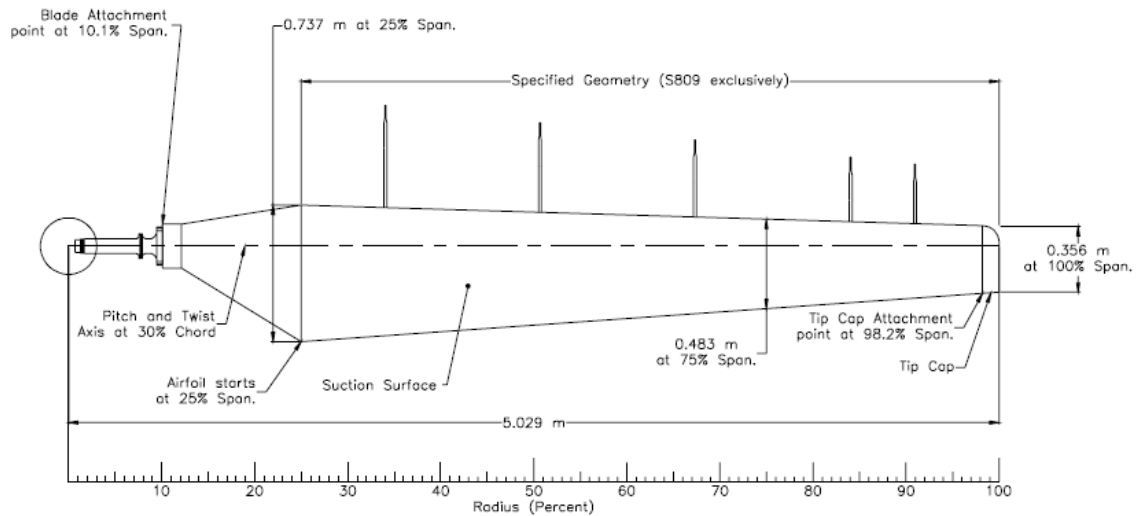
Blade planform dimensions [from Ref. [58]]
